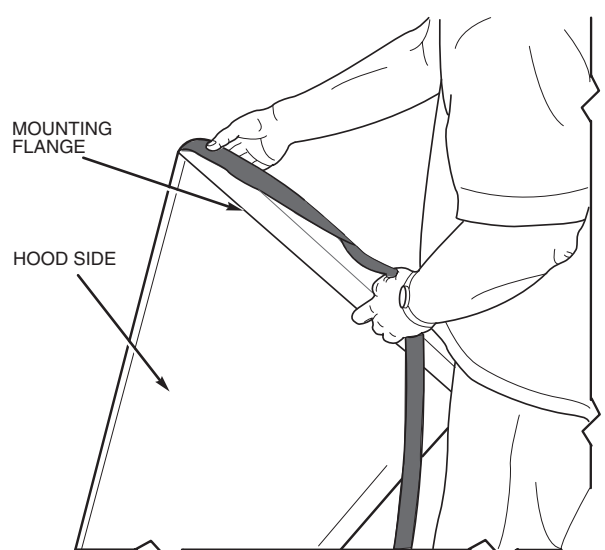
Adding Seal Strip to Back of Hood Top Mounting Flange
